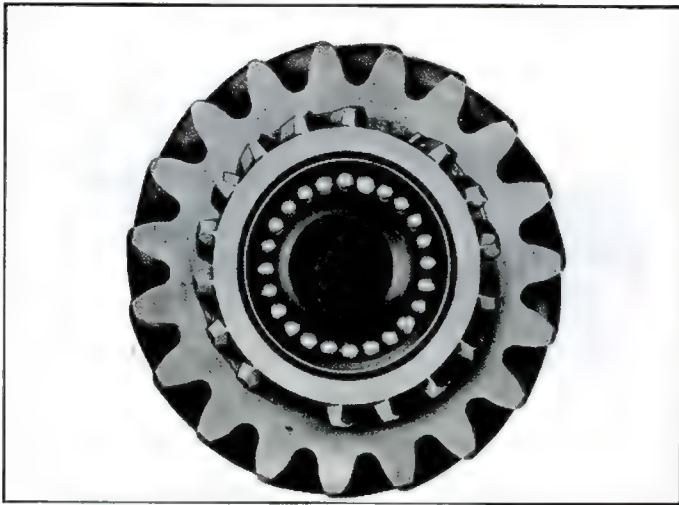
A-27—Mainshaft Pilot Bearings in Clutch Gear
